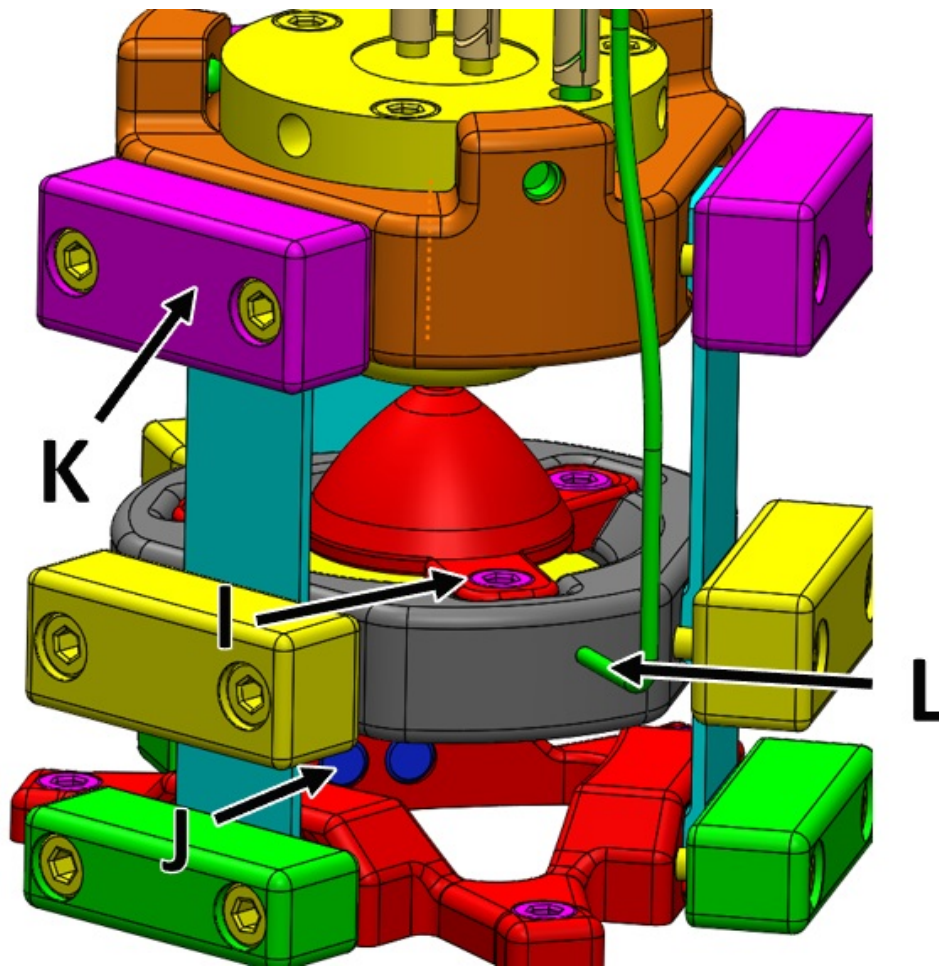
The design with the C1 lens hidden. I: The extractor is bolted onto the aperture seat. J: The bottom flexure endpoint has two dowel pins to constrain rotation. K: The flexure clamps have rounded and buried bolts to minimize discharge risk. L: The insert location of the aperture seat wire. The flat spot touches the extractor, forcing the upright orientation.
